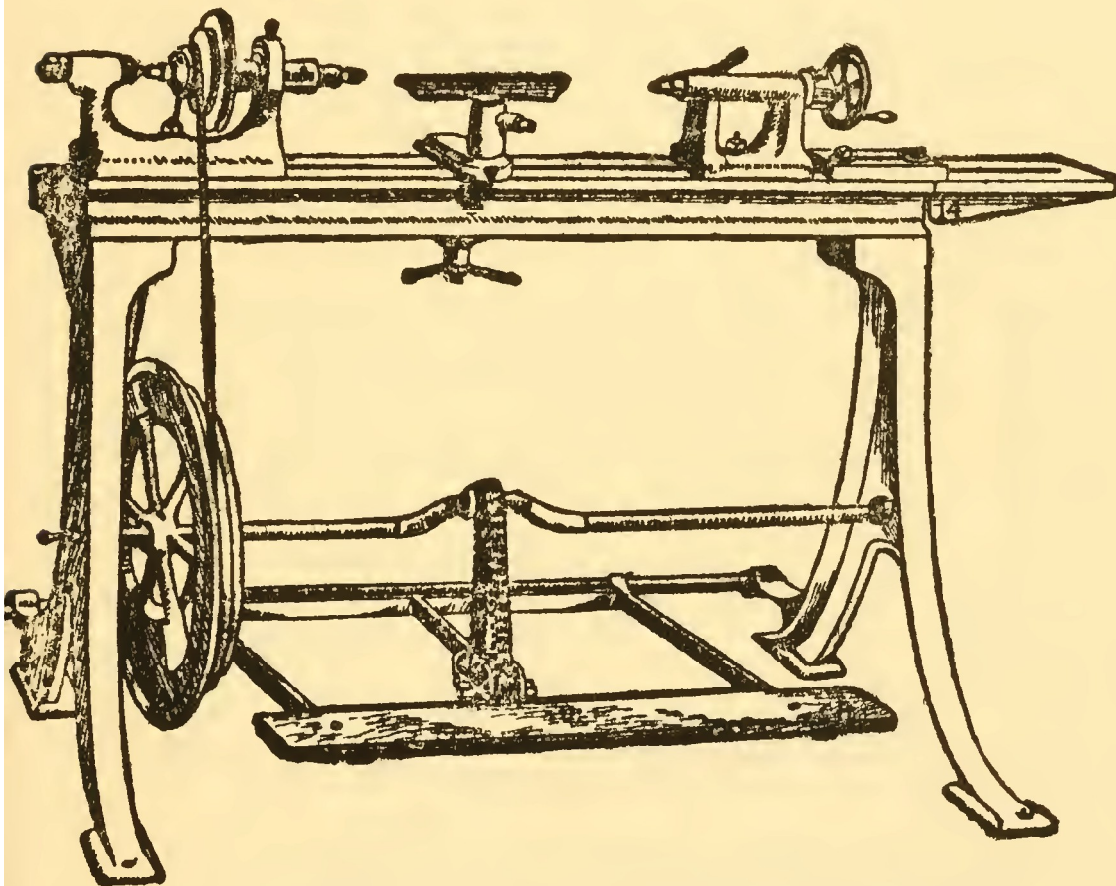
SKETCH OF STANDARD TREADLE LATHE, WITH EXTENSION PIECE.
